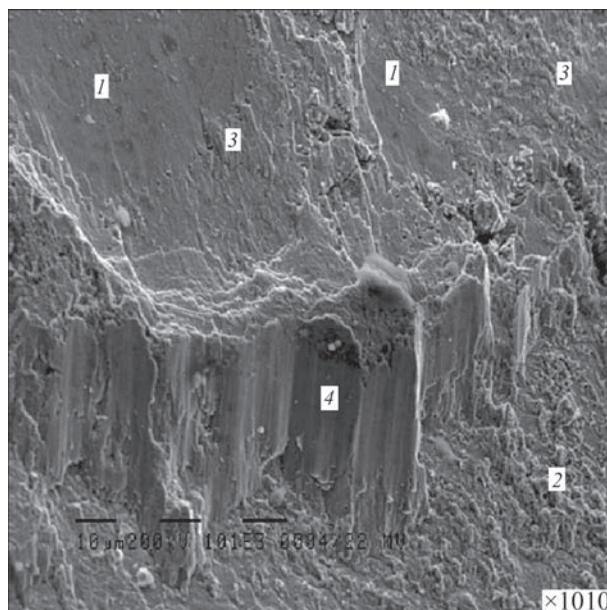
Fragment of fracture surface of the welded joint. Testing temperature of 600 °C (1 — steps with brittle banded relief; 2 — dispersed pits of ductile fracture; 3 — shear facets, quasibrittle failure areas; 4 — banded relief, brittle fracture mode, band width $\Delta_b = 10 - 20 \mu\text{m}$)
